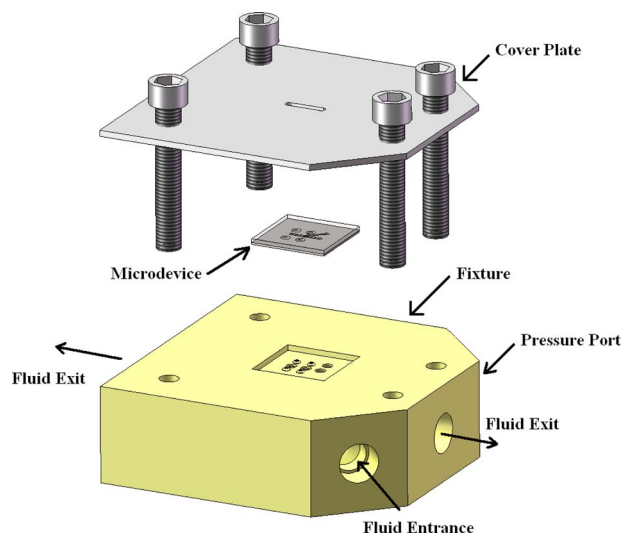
Schematic of the assembly of the fixture, the microdevice and the cover plate
